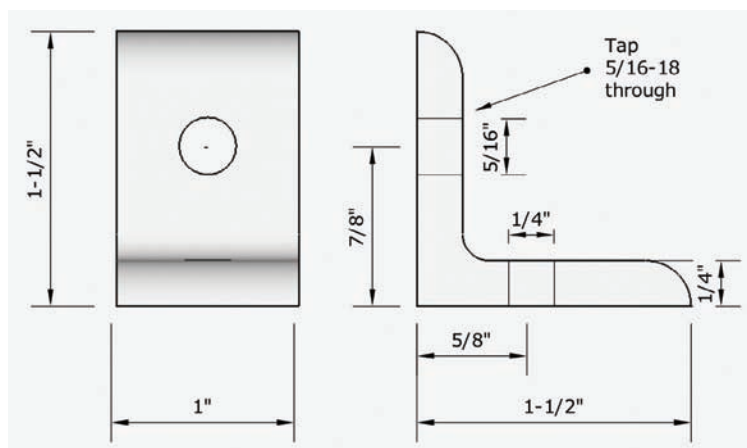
Dimensions for the aluminum angle brackets that clamp the shield to the lathe bed
